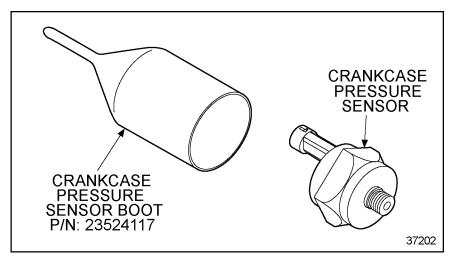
Crankcase Pressure Sensor - Series 4000
